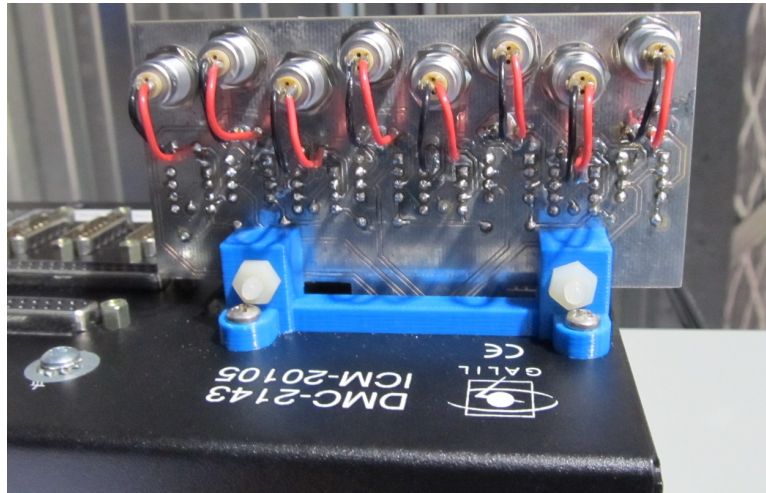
Printed circuit board for signal input buffer, back view, and mounting to controller board.
